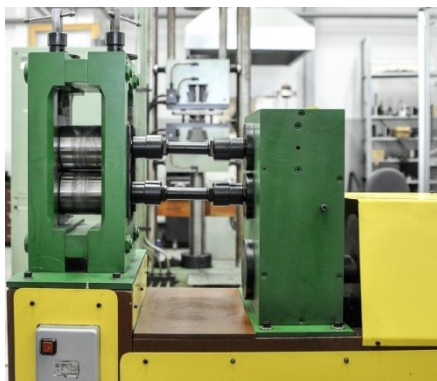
View of the main part of DUO-100 longitudinal rolling mill
